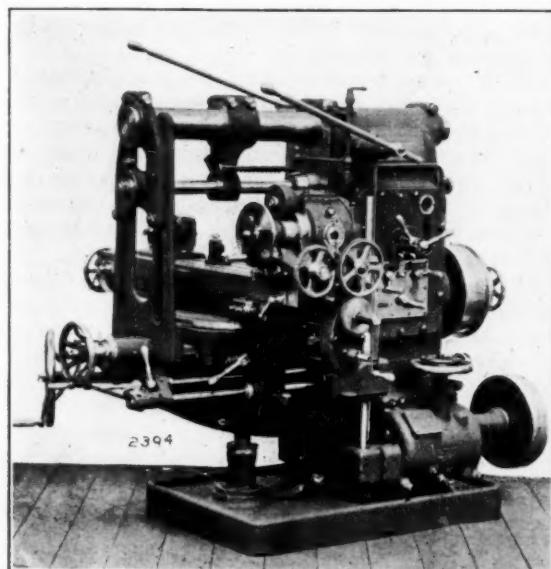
UNIVERSAL MILLING MACHINE OF BRITISH MAKE
